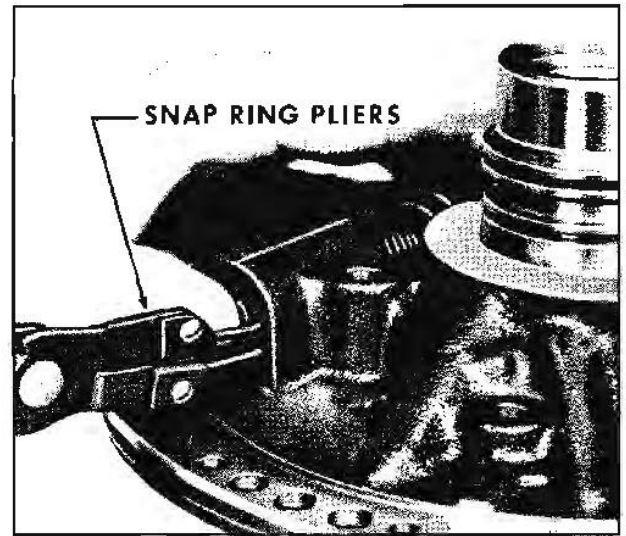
B-102 Removing Boost Valve Sleeve Snap Ring
